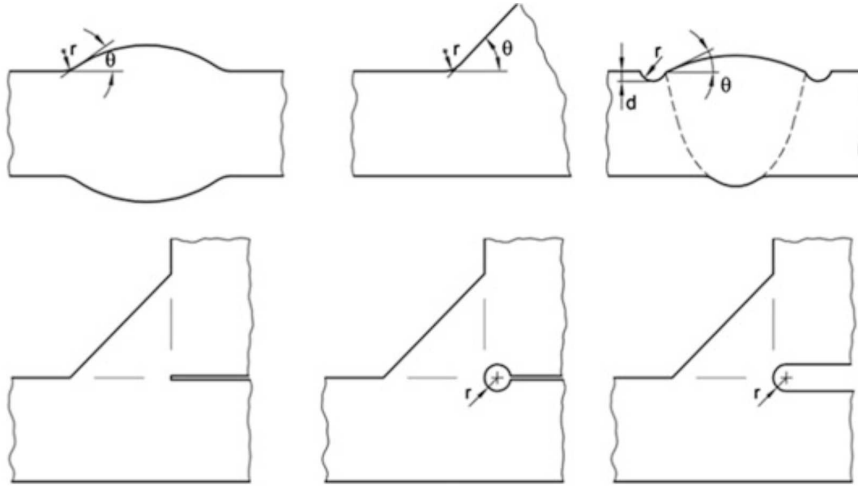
Recommended rounding of weld toes and roots [1]
